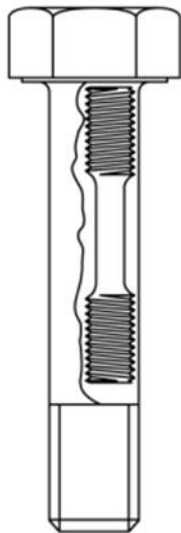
Location of Standard Round 2-in. Gage Length Tension Test Specimen When Turned from Large Size Bolt
